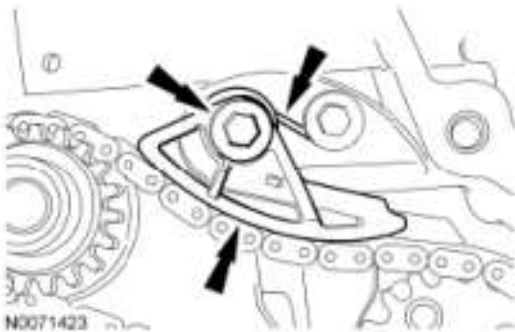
Locating Oil Pump Chain Tensioner With Bolt
